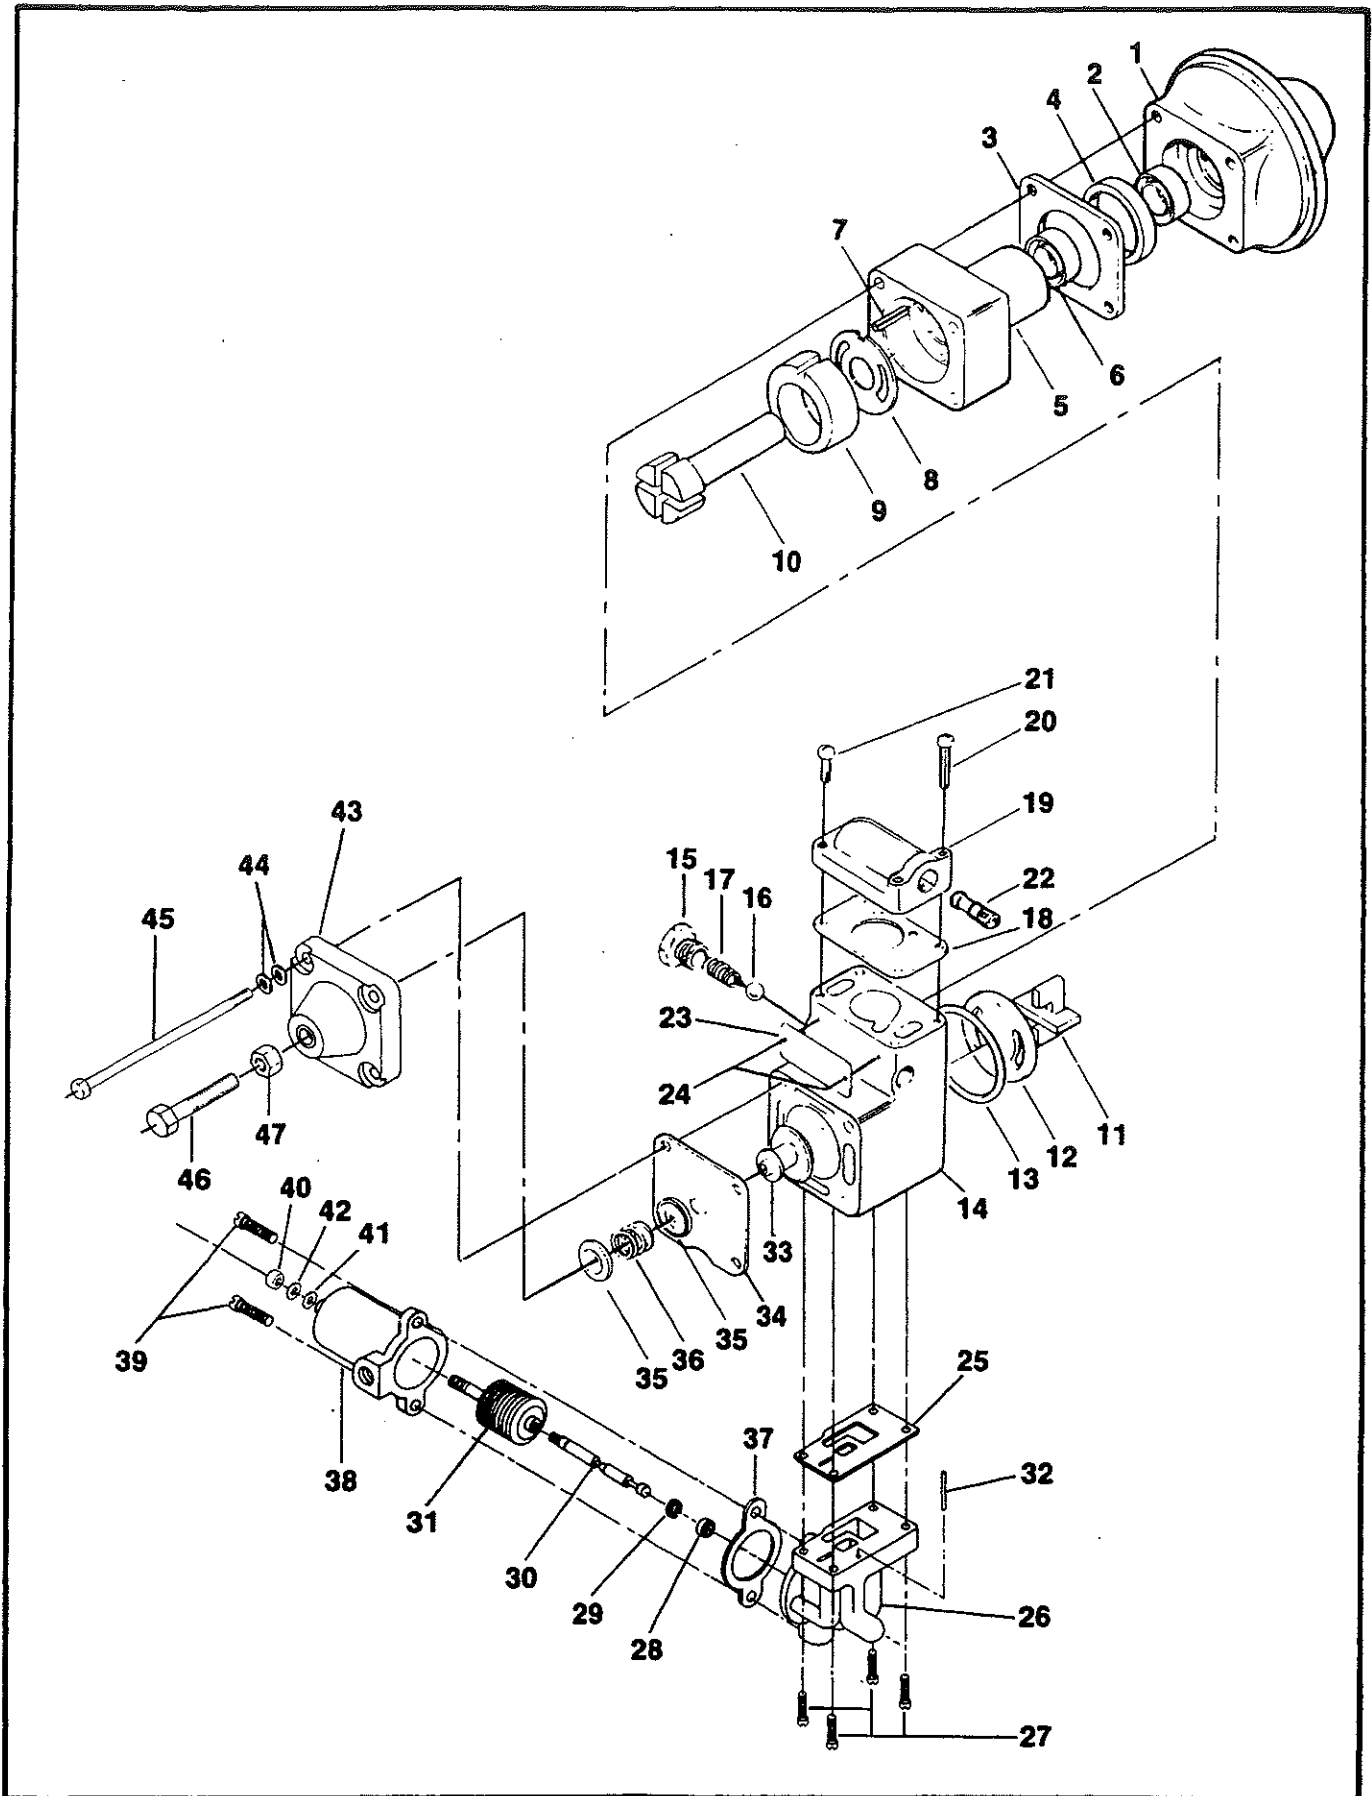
FUEL PUMP ASSEMBLY.
